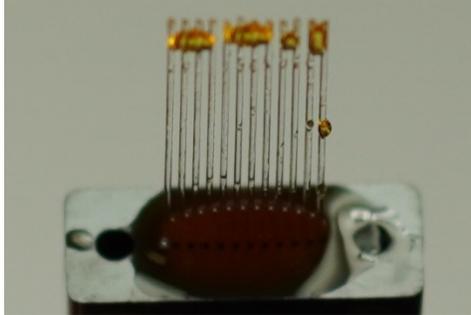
Improper bead shown – Epoxy should not wick into the holes
